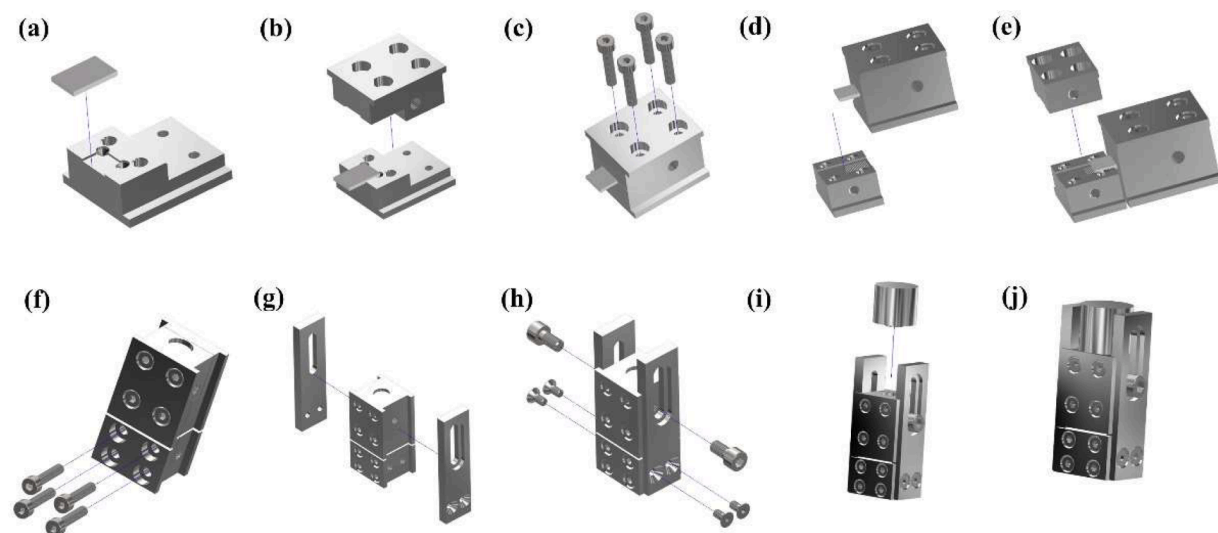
Assembly sequence illustration of the designed sample fixture in the compression mode.
